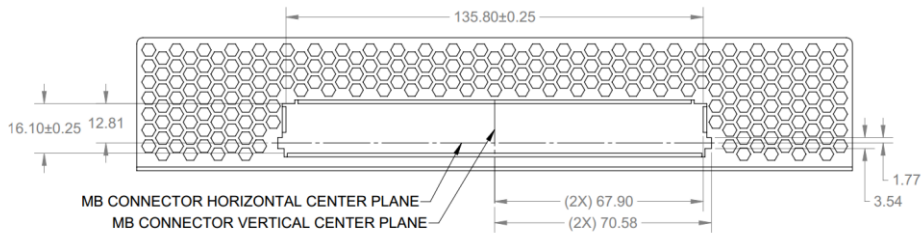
Large Form Factor Baseboard Chassis CTF Dimensions (Side View)
